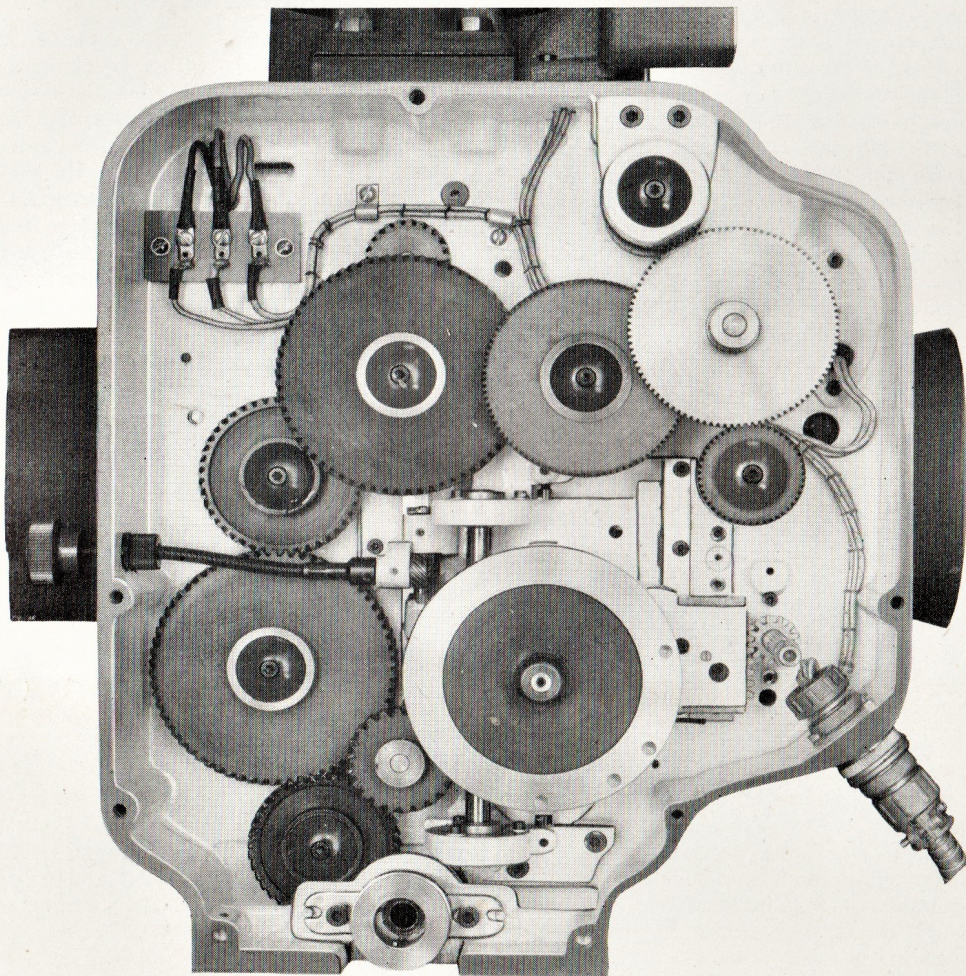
Motiograph "AA" projector mechanism, drive side, cover removed
